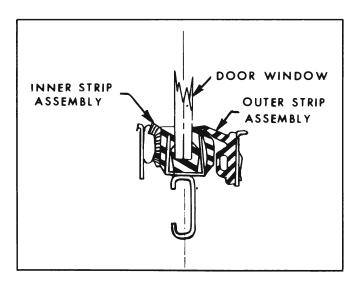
Front & Rear Door Glass Run Channel Inner and Outer Strip Assemblies
